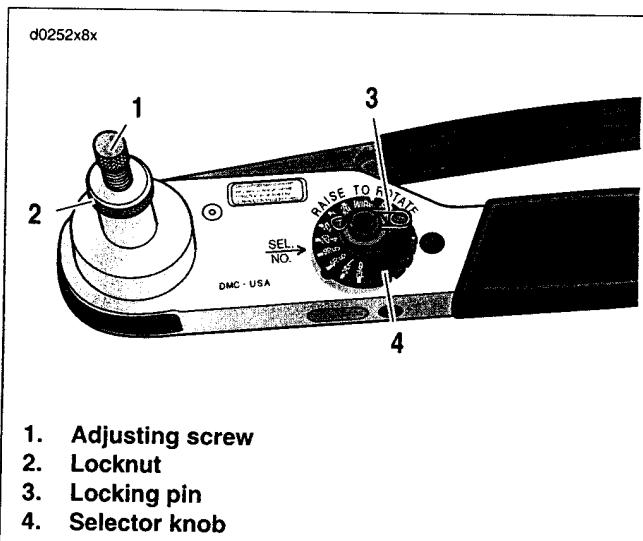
Deutsch Solid Barrel Contact Crimp Tool
